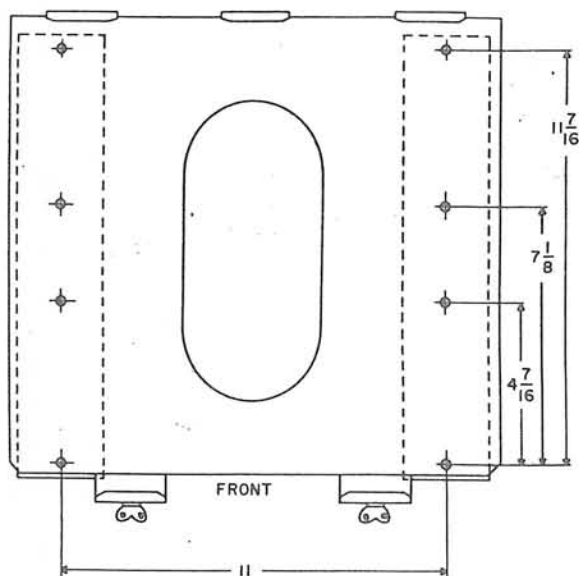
Case CY-6063/UG Shock-Mounted Installation Mounting Holes Location
